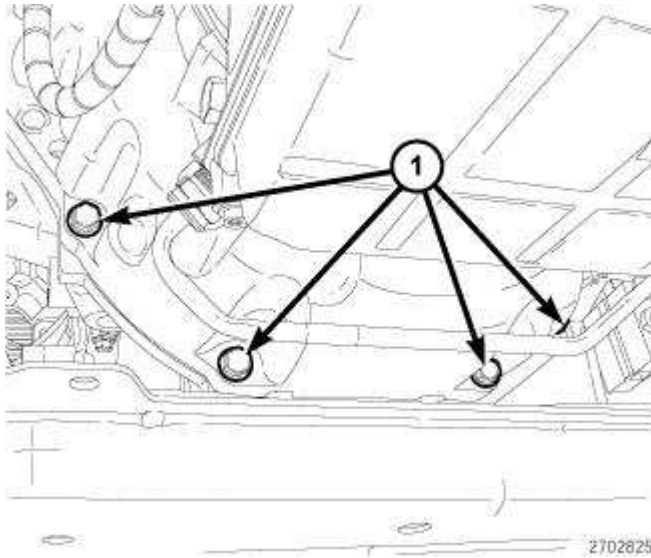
Transmission-To-Engine Oil Pan Bolts
